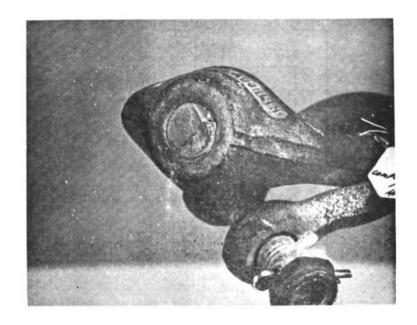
1" Bolt Failure at Buoy Bridle Connection
